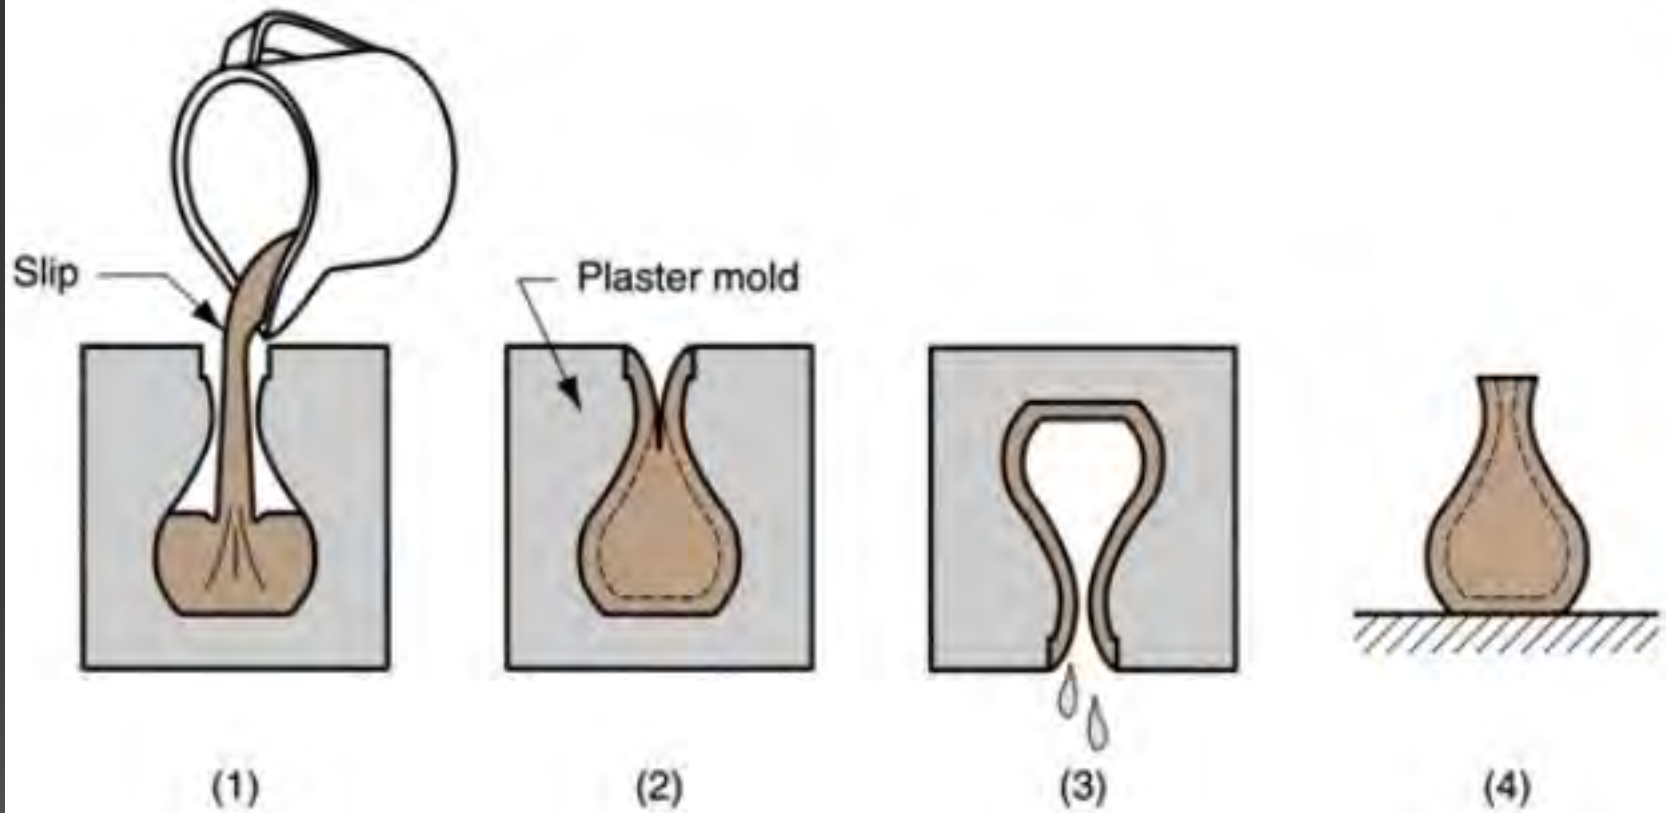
Schematic illustrating the drain-casting process. (a) Fill mold with slip, (b) mold extracts liquid, forms compact along mold walls, (c) excess slip drained, and (d) casting removed after partial drying.
